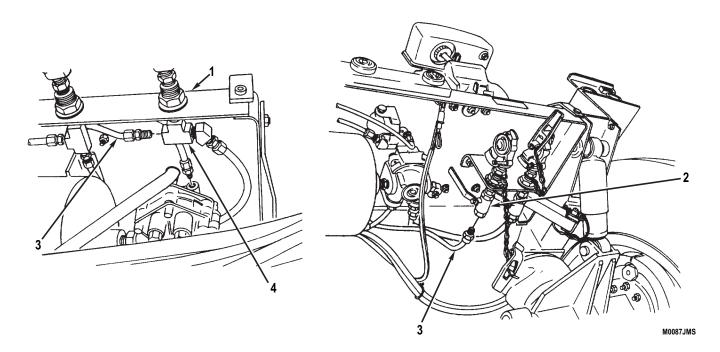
Emergency Shutoff Valve-to-Tee Tube Assembly Replacement.
